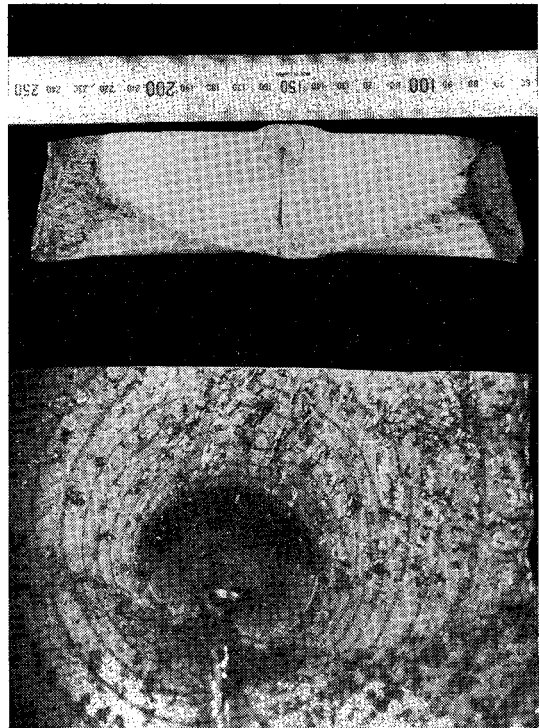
Fracture Surface with Beach Marks of T-8 Specimen.
